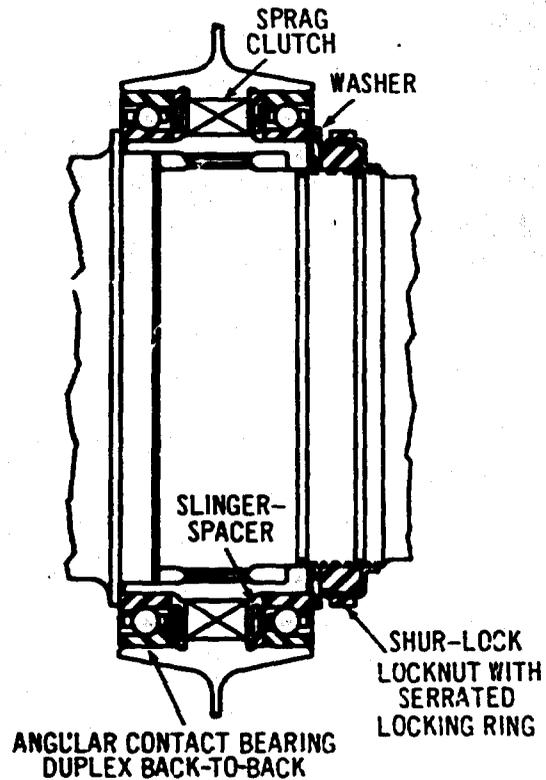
Combination of Shaft Locknut and Locking Ring
